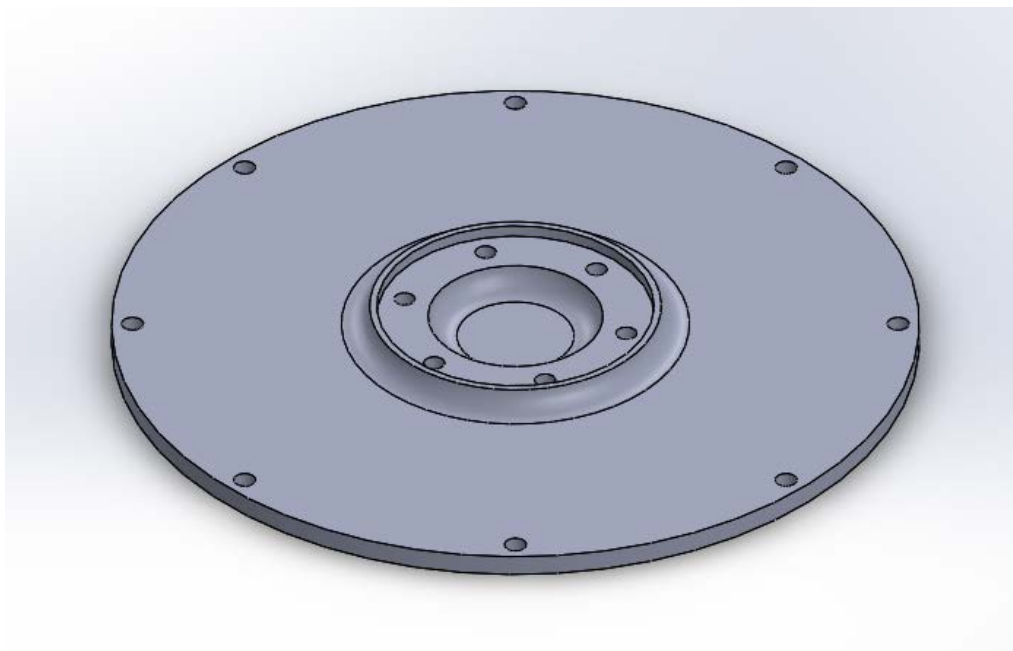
Image of flywheel designed for John Deere 4.5L test engine
